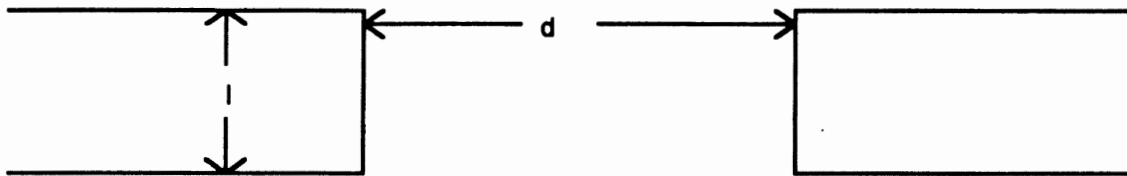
Cross-Sectional View of the Plate with the Drilled Holes.
